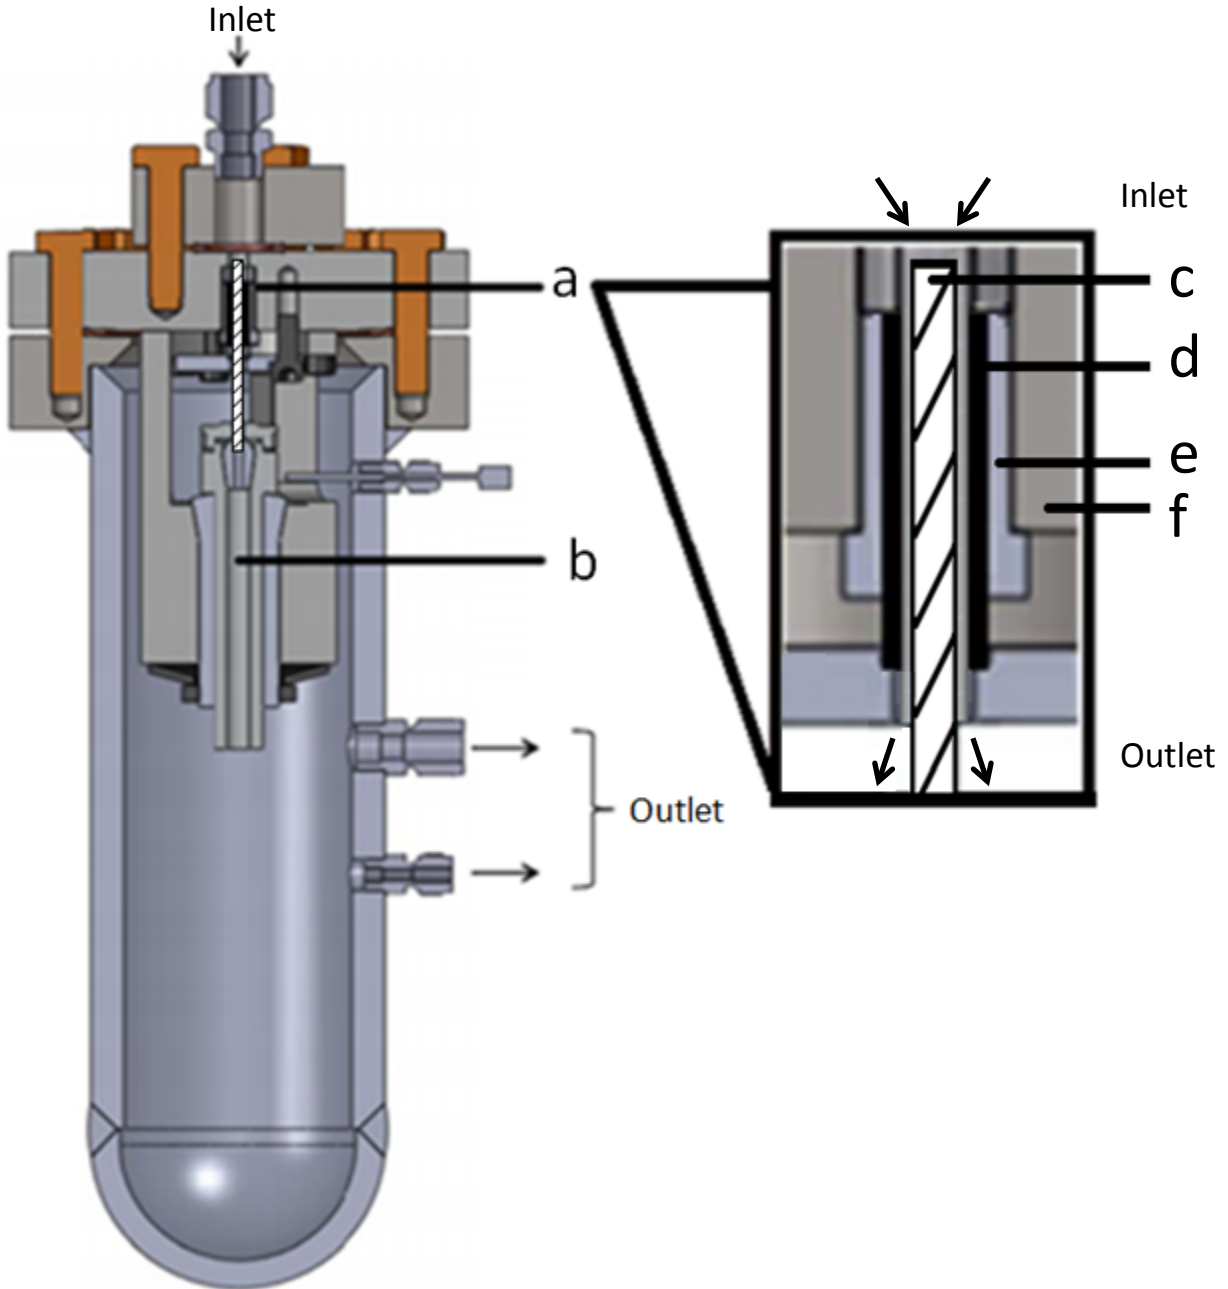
Cross Section of pressure vessel showing a) seal location/configuration, b) collet sub-assembly, c) shaft, d) seal, e) spacer drill bushing, f) test section flange.
